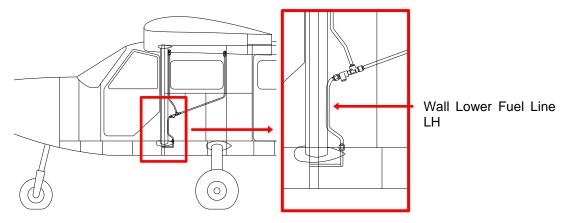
LH Wall Lower Fuel Line location (RH Wall similar)
